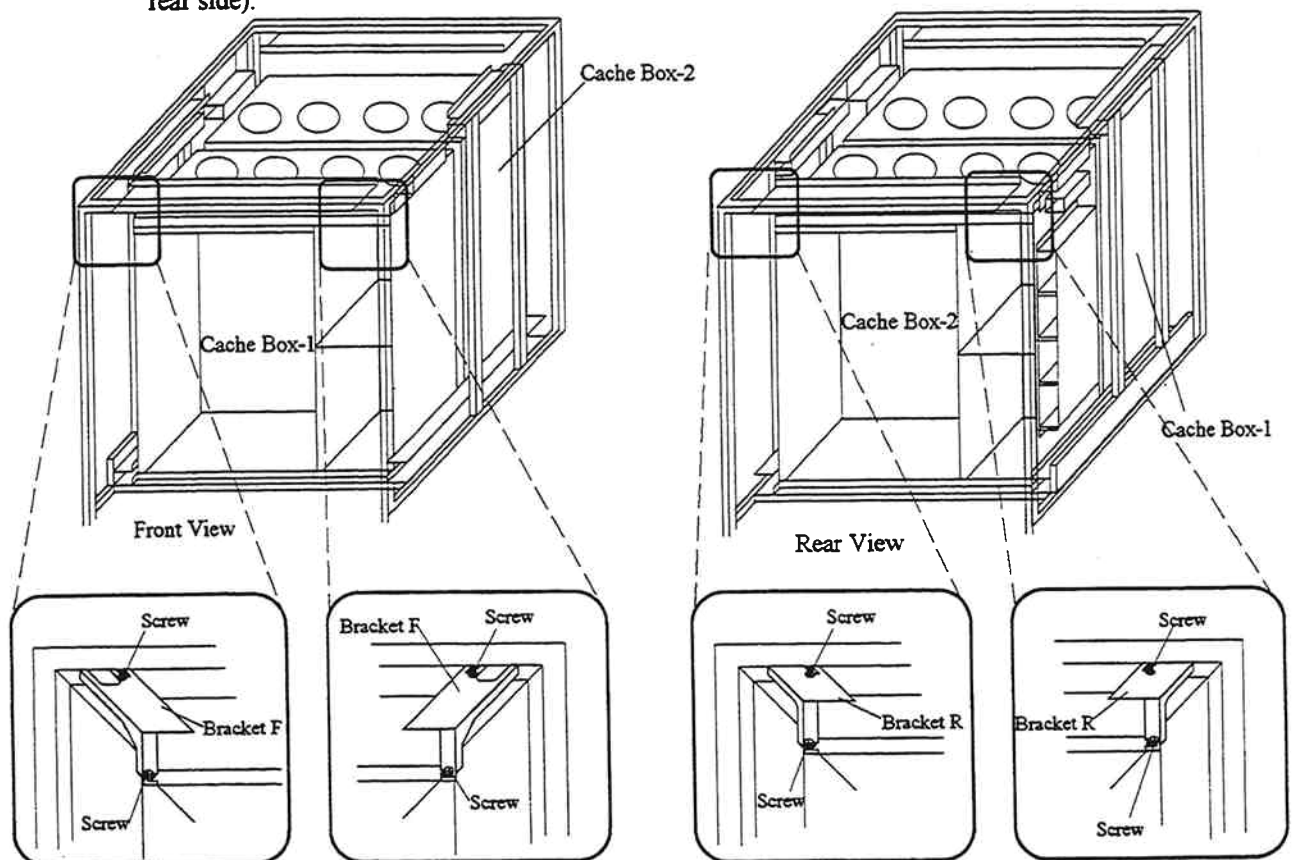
Attachment of the Brackets
